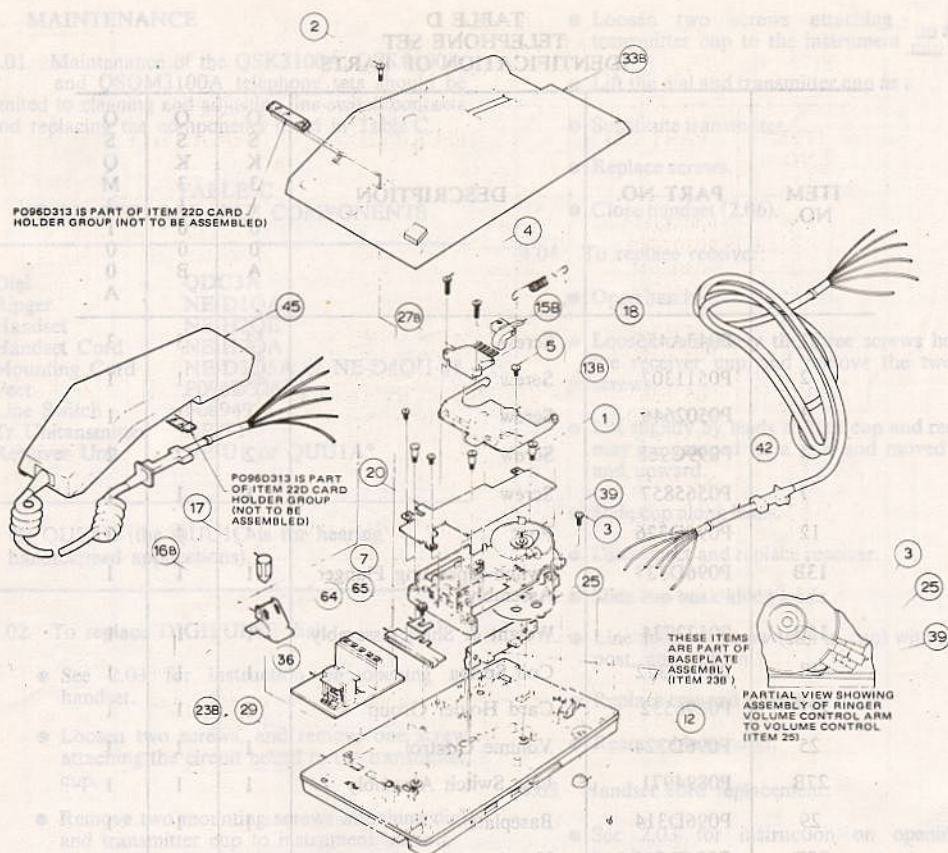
Exploded View — QSK3100A, QSK3100B and QSQM3100A Telephone Sets
